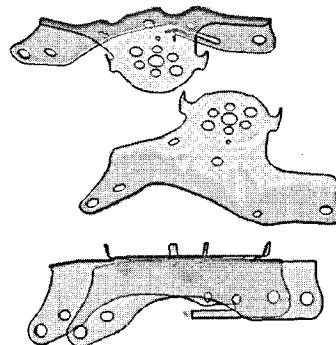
(b) Conformity of the finally stamped product for blank design D5 to the basic design of the center hinge at the final stage
